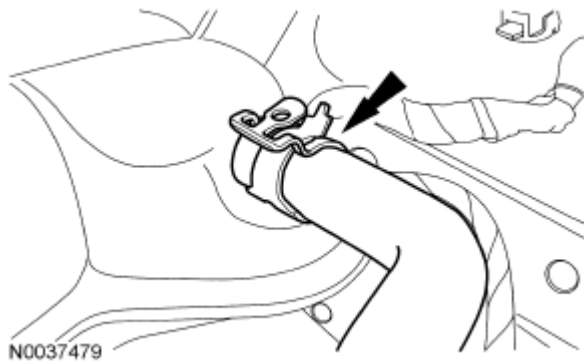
Locating Degas Bottle Coolant Hose Clamp
